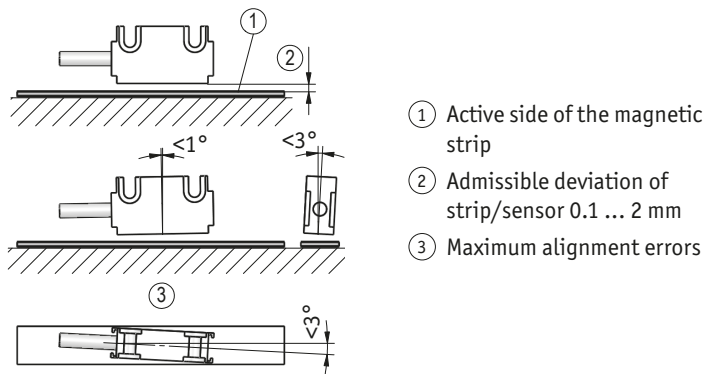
Mounting sensor / magnetic tape, gap measure, tolerances
